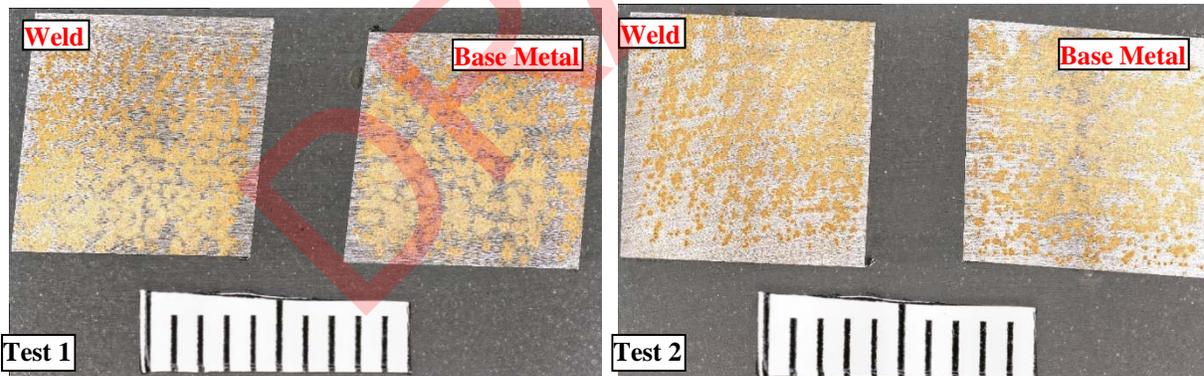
Low magnification morphology of Weld-Metal couple Sample 2.
